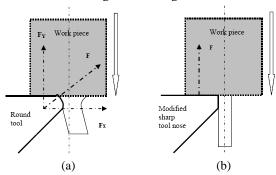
(a) Resolution of cutting forces for microturning with a radius tool nose of commercial PCD insert, (b) Modified sharp tool nose to reduce F_X component.
